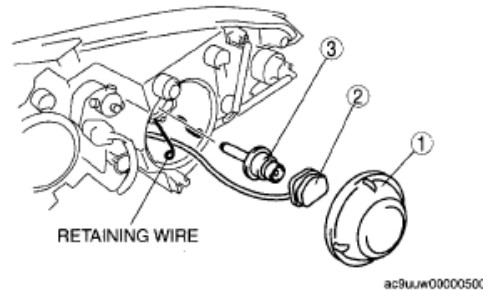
Identifying Discharge Headlight Bulb, Connector & Cover
